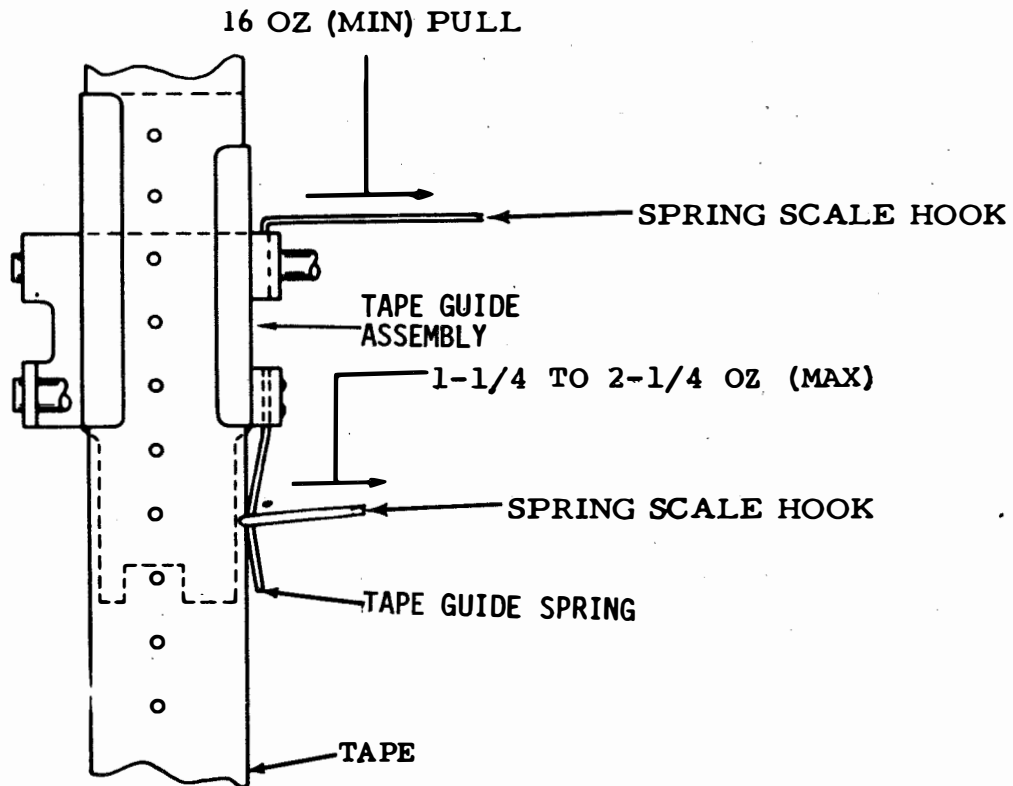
Tape Guide Spring (Tape Chute) and Tape Guide Assembly Spring
